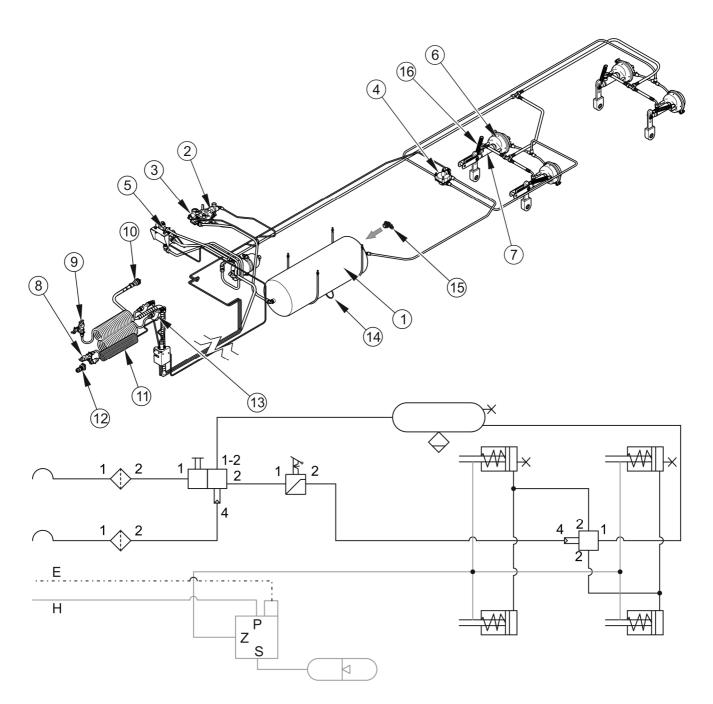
Design and diagram of combined braking system (double conduit pneumatic braking system + hydraulic braking system with electrical protection valve and braking force regulator)
